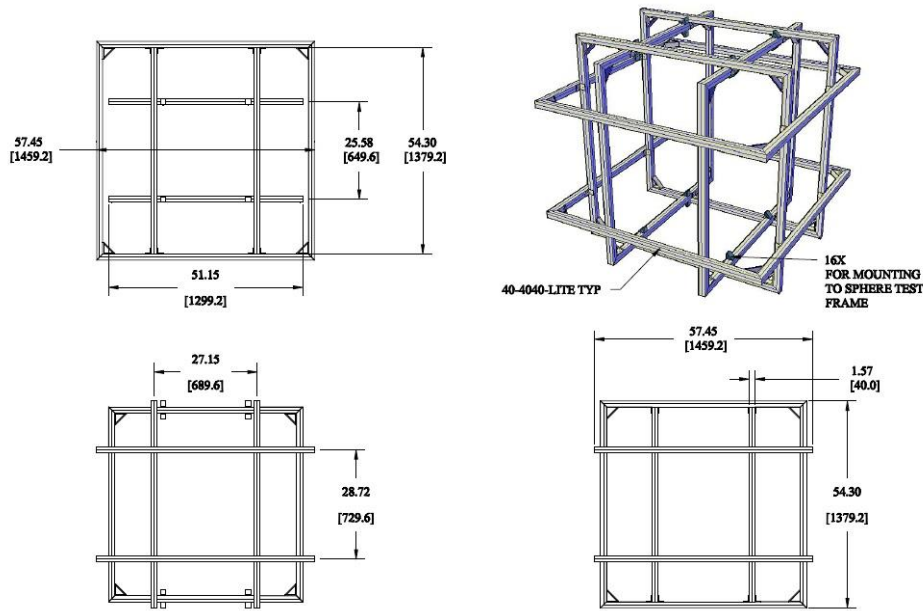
Helmholtz cage design (measurements are in inches [millimeters]).
